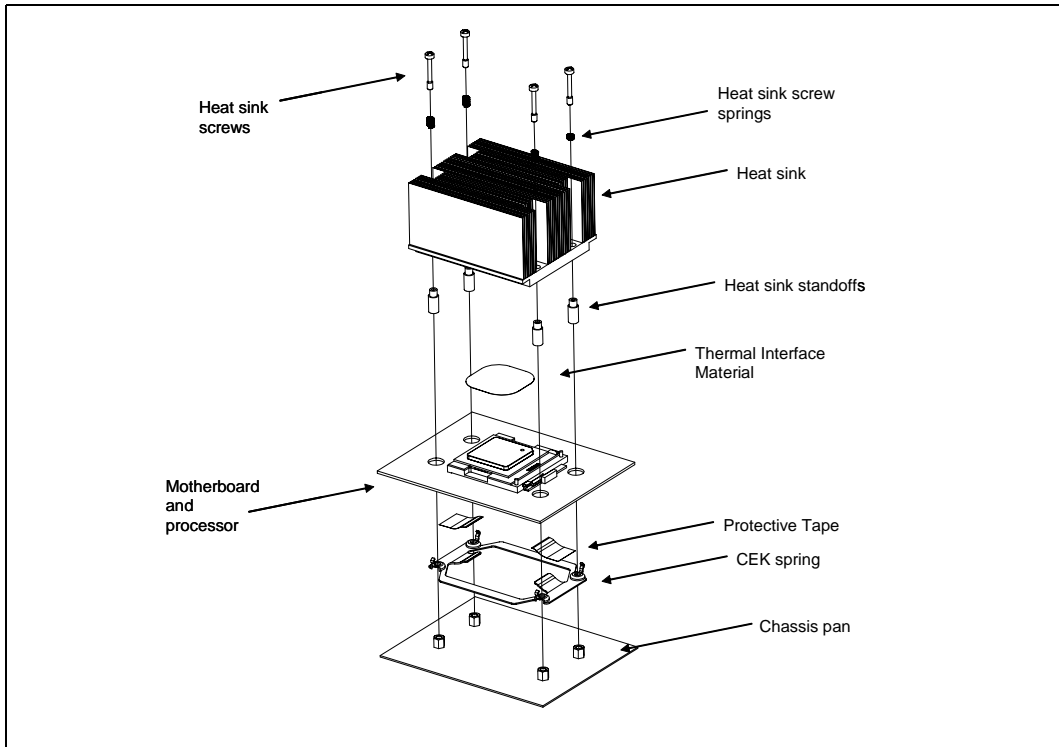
2U Passive Dual-Core Intel Xeon Processor 5000 Series Thermal Solution (Exploded View)
